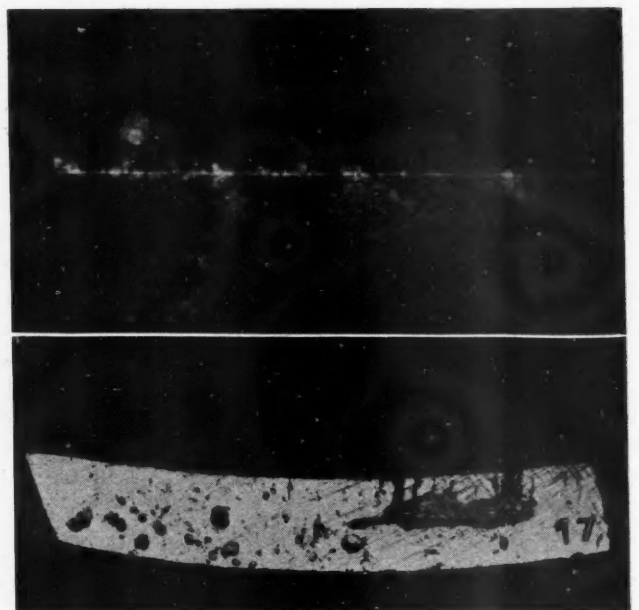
Sand-cast aluminum specimen with blow holes. The upper picture is a radiograph (Fig. 4a) of the specimen while the picture below (Fig. 4b) is a section indicated along the faint gray line in Fig. 4a
